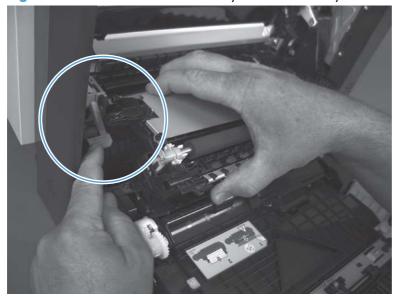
Remove the secondary transfer assembly (3 of 3)
